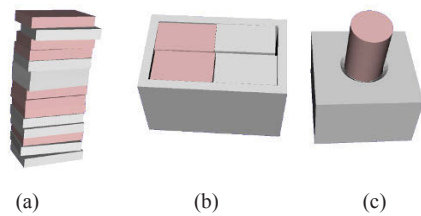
Assembly tasks: a) Pile of boxes b) Packing box c) Peg & hole
